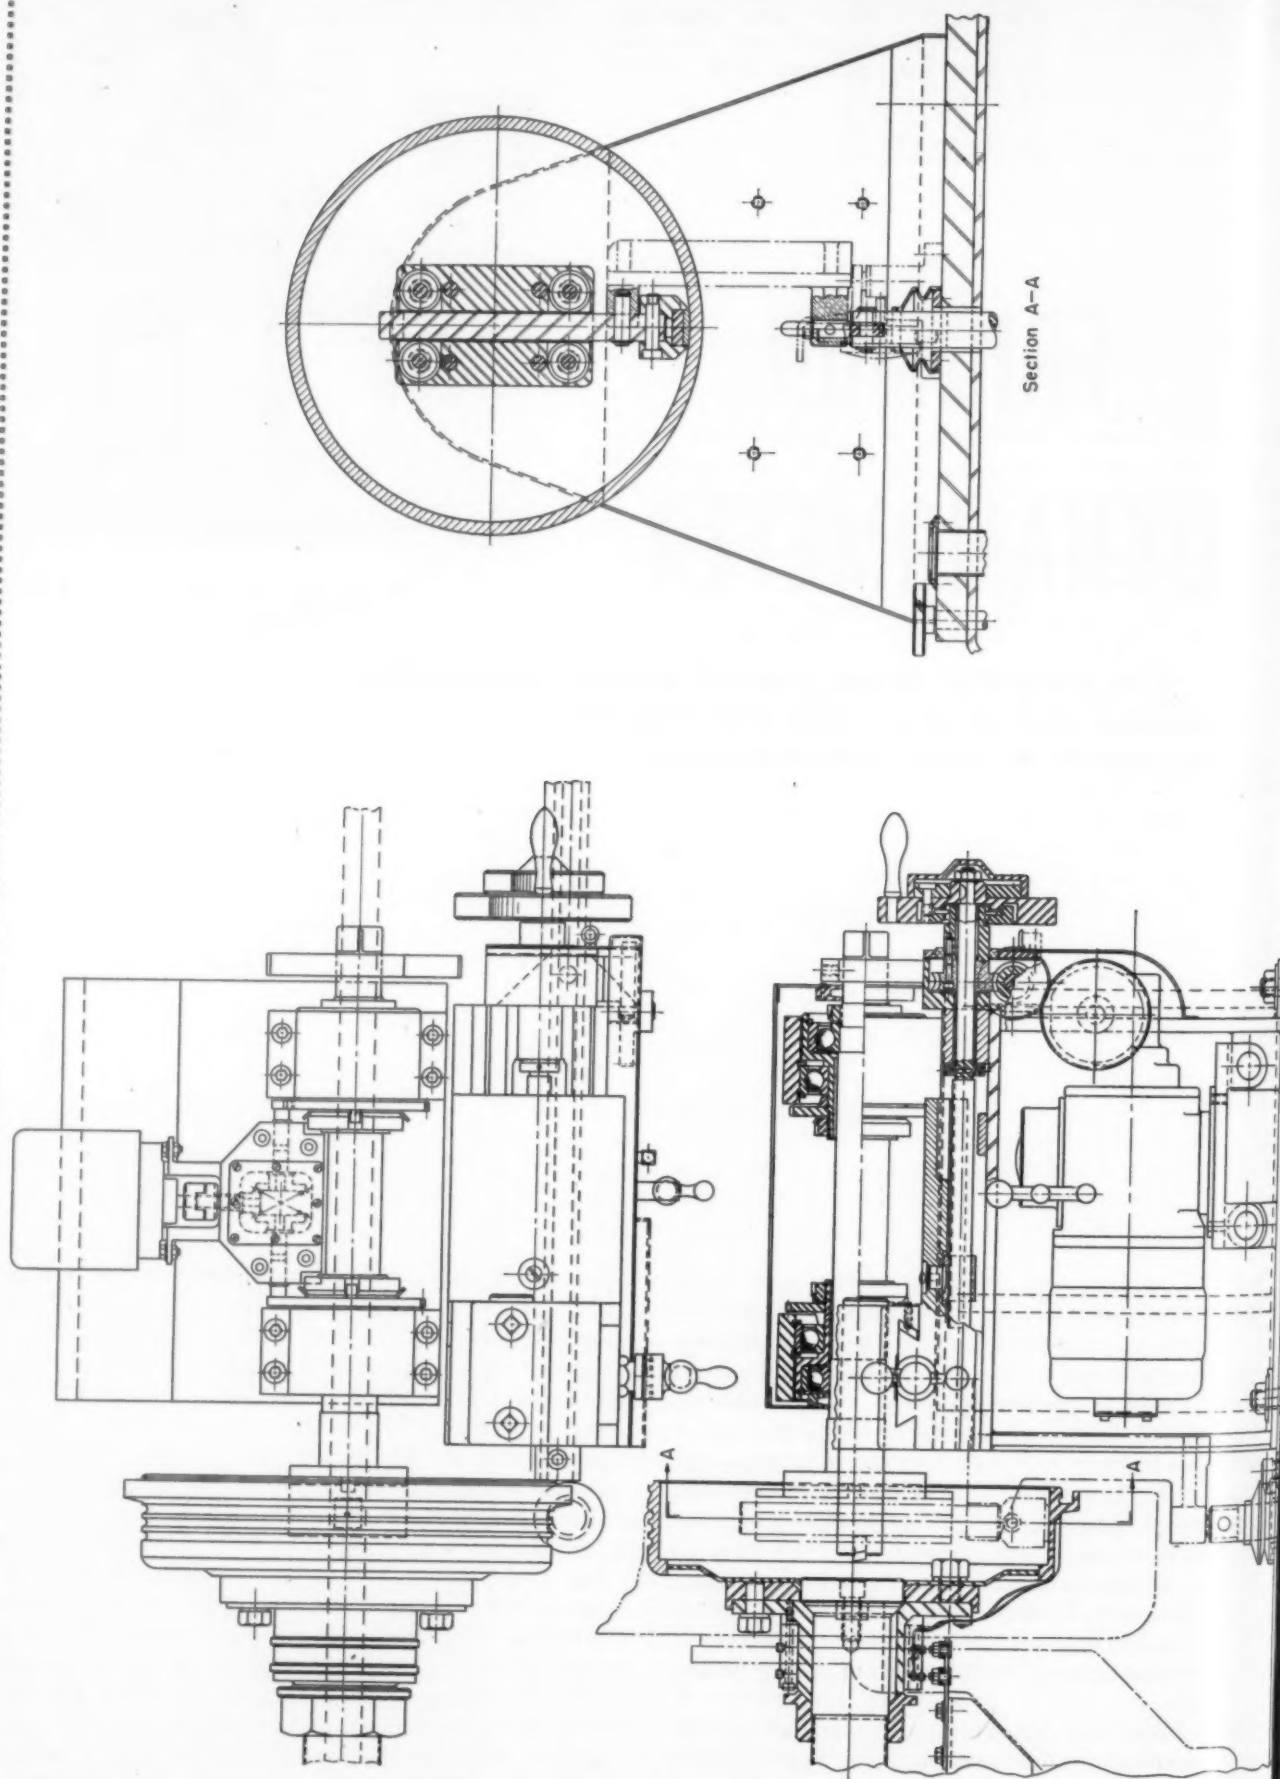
Cross section drawing showing sample roller slide and contrarotating bearing arrangement of shaft for low friction
